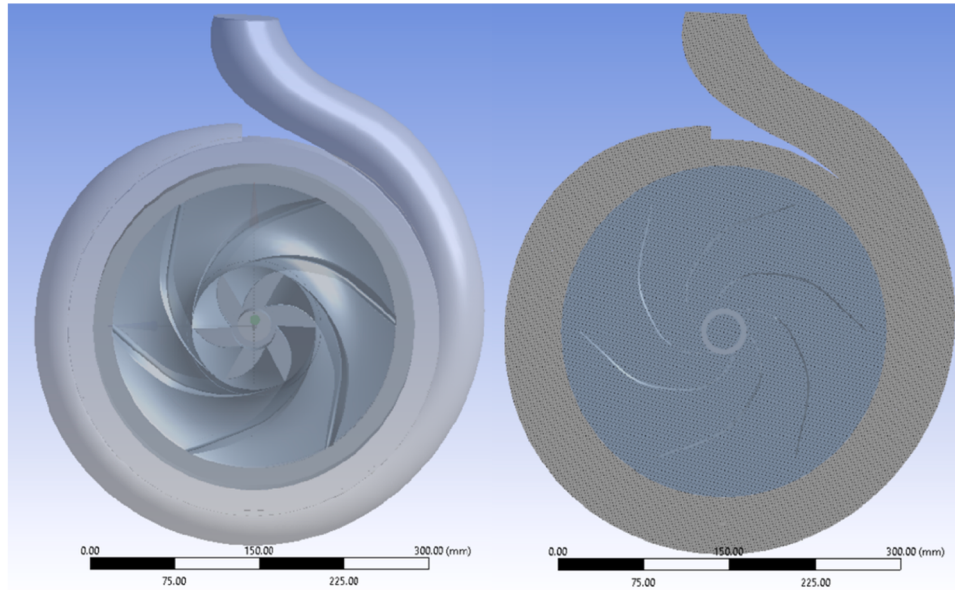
Impeller and Volute in one geometry using Boolean tool.
